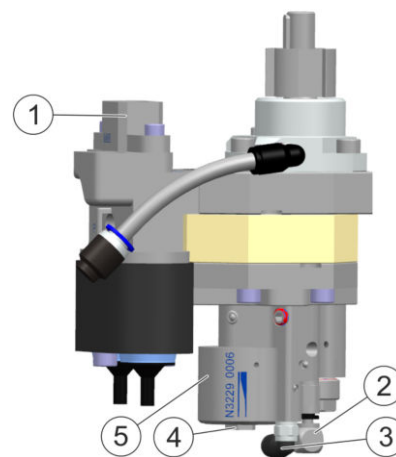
Gear Wheel Pump Paint/ Master lacquer
